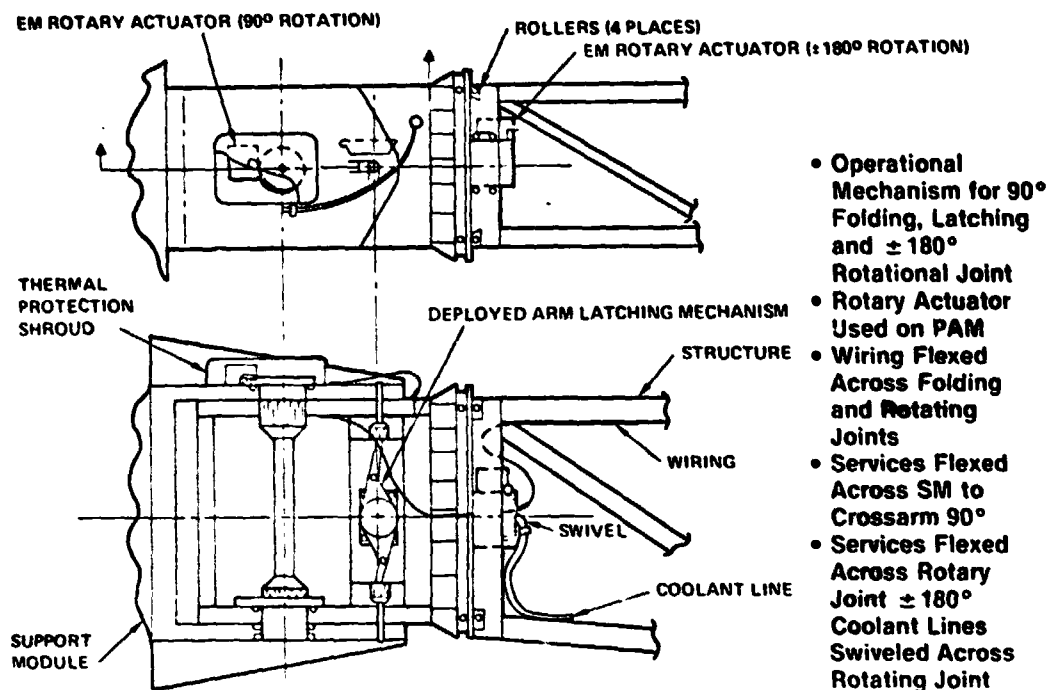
Second-Order Platform Arm Folding Joint Mechanism
